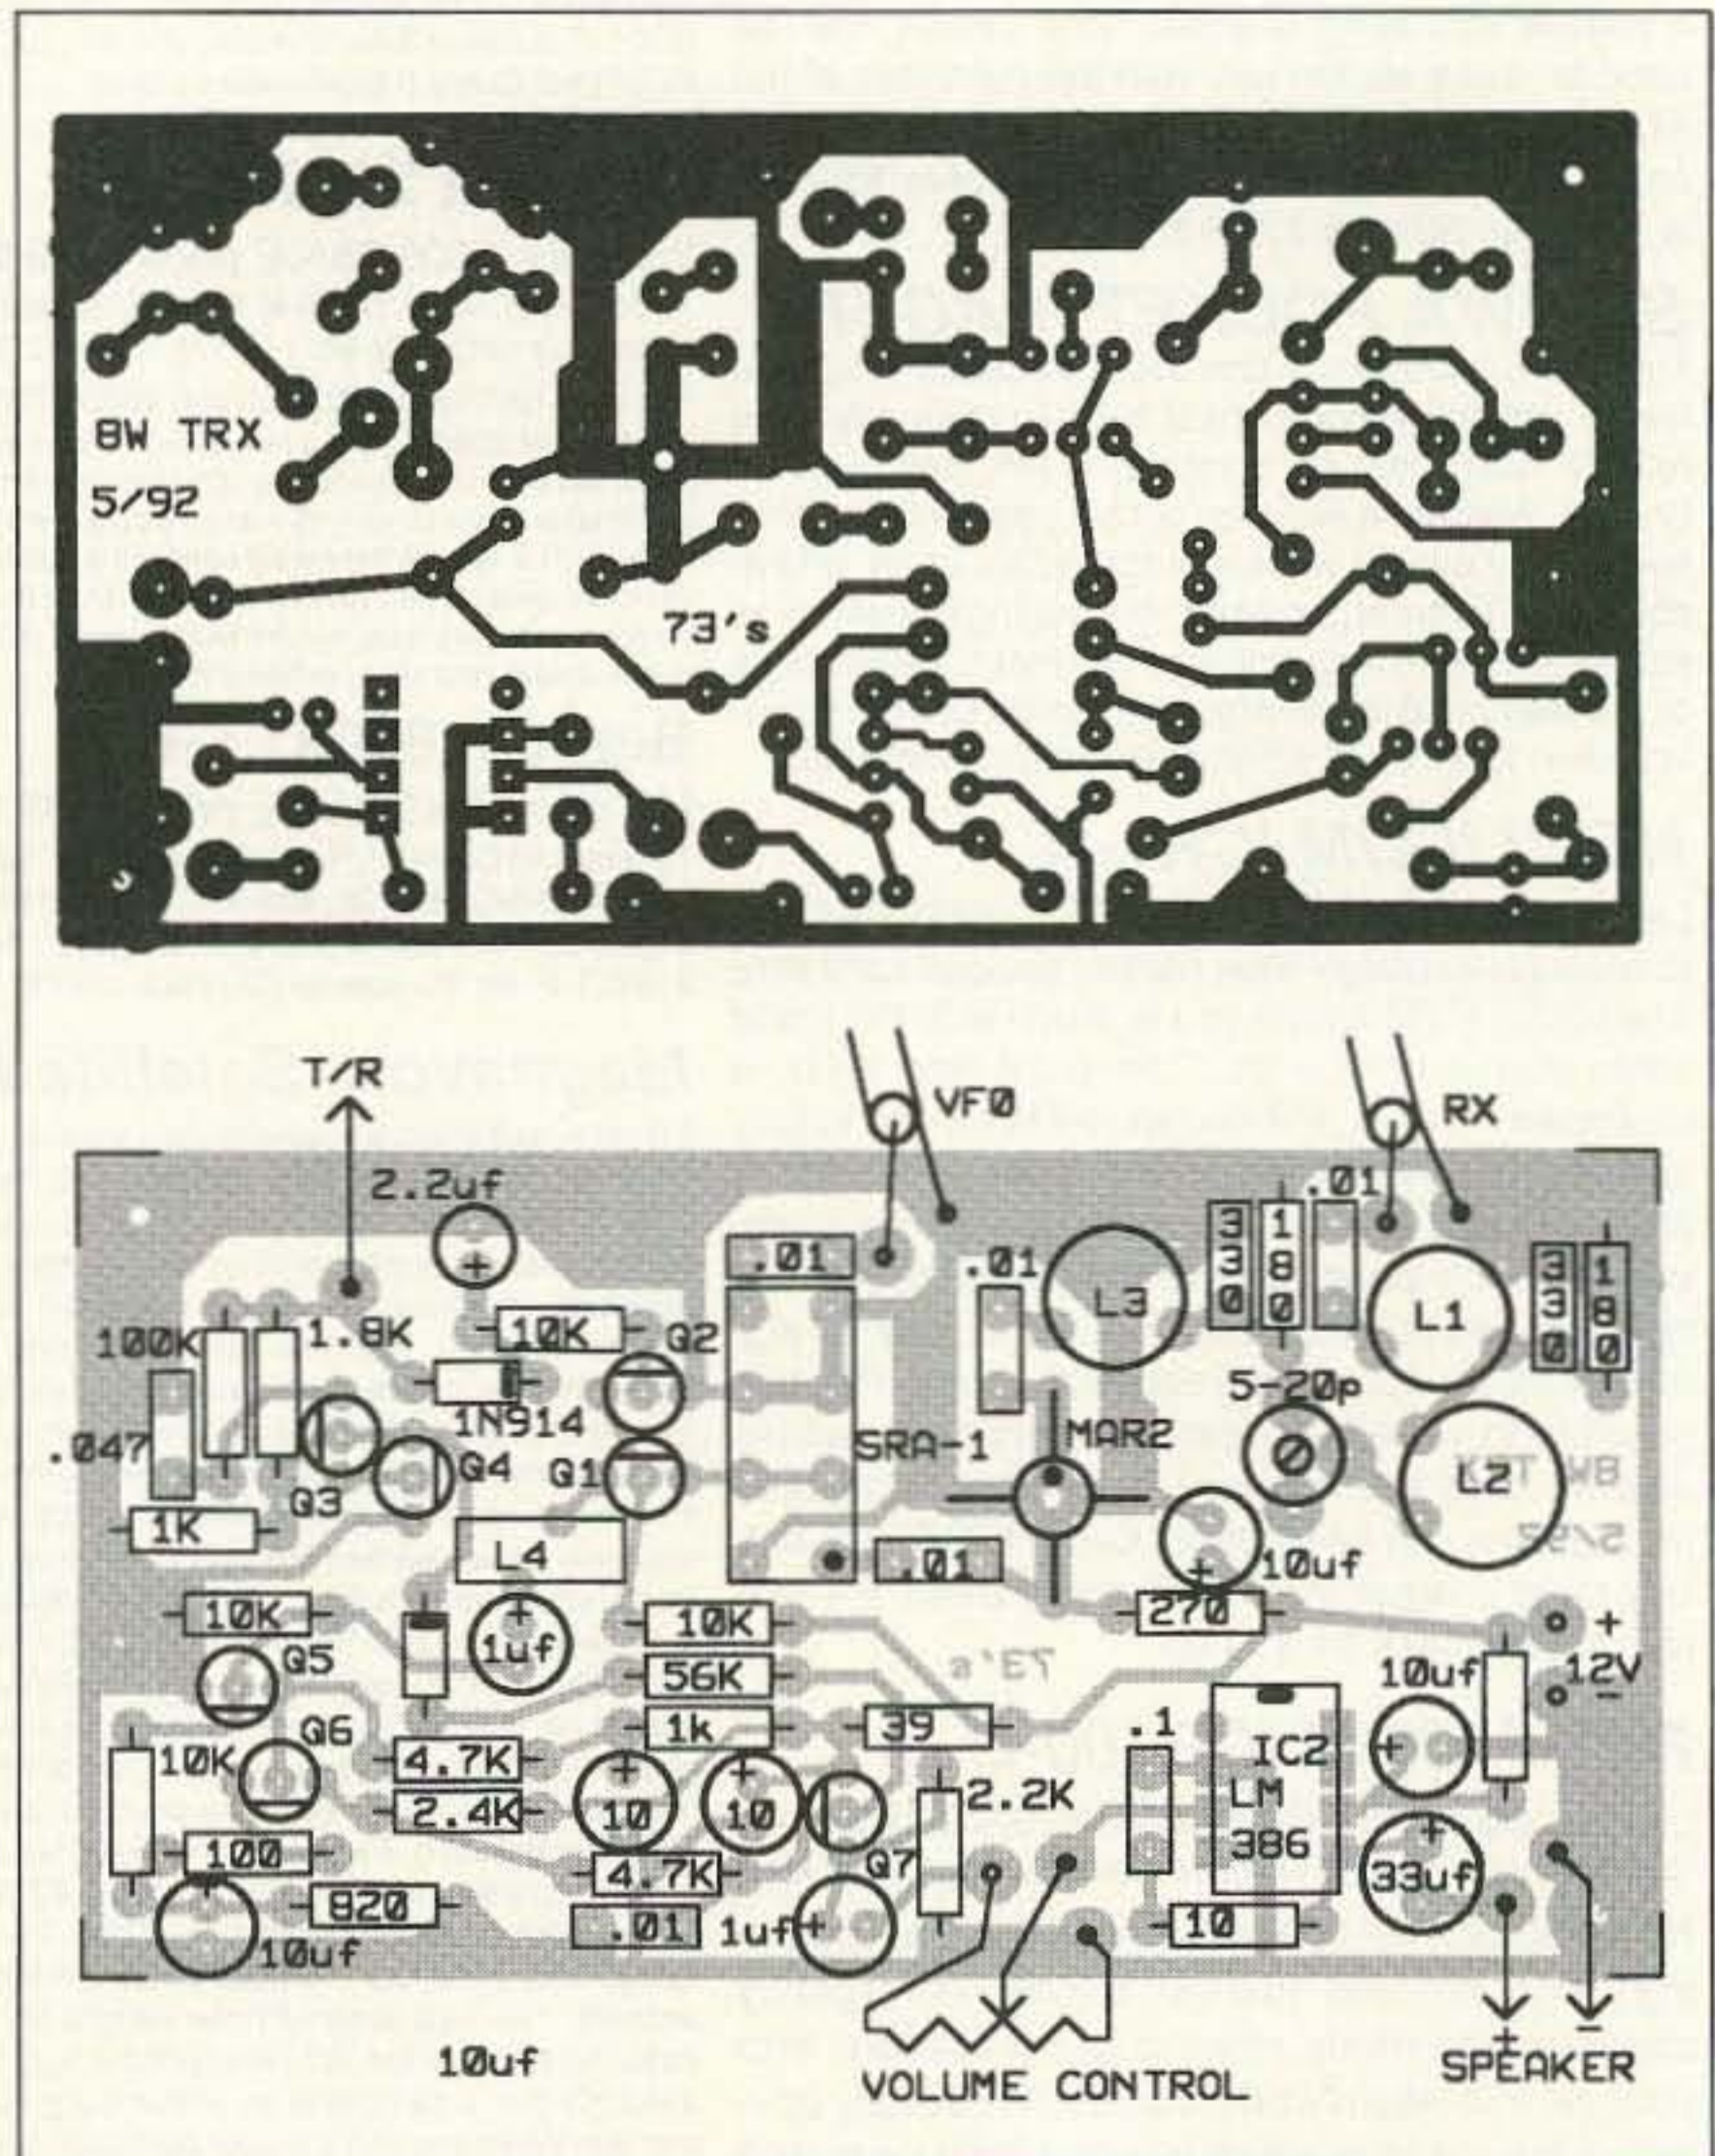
a. PC board foil pattern for the receiver board. b. Parts placement.
